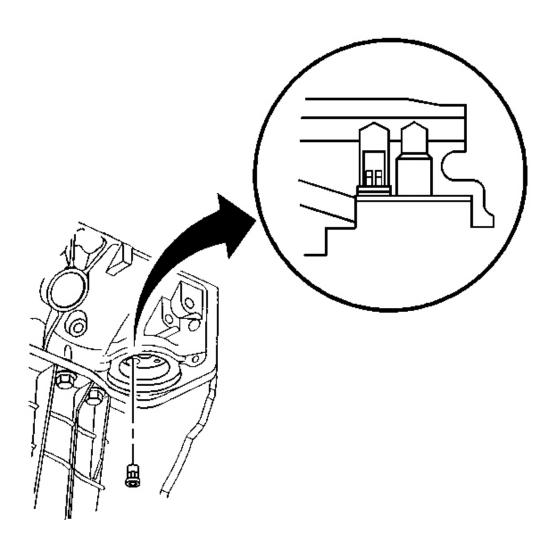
View Of Oil Filter Bypass Valve Courtesy of GENERAL MOTORS CORP.
